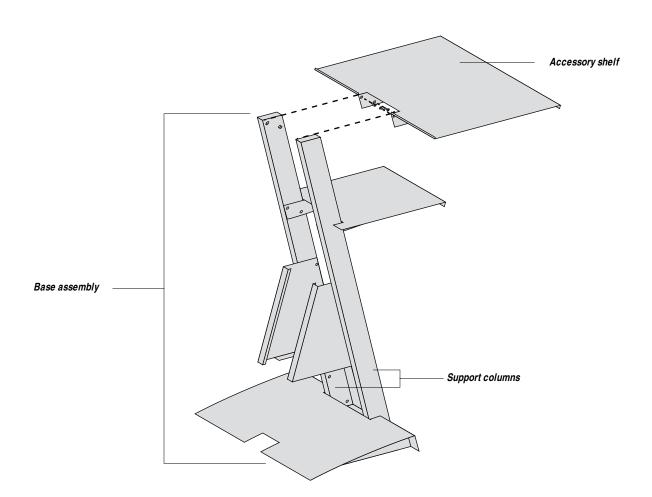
Fiery XJ-R/R2 furniture — exploded view
